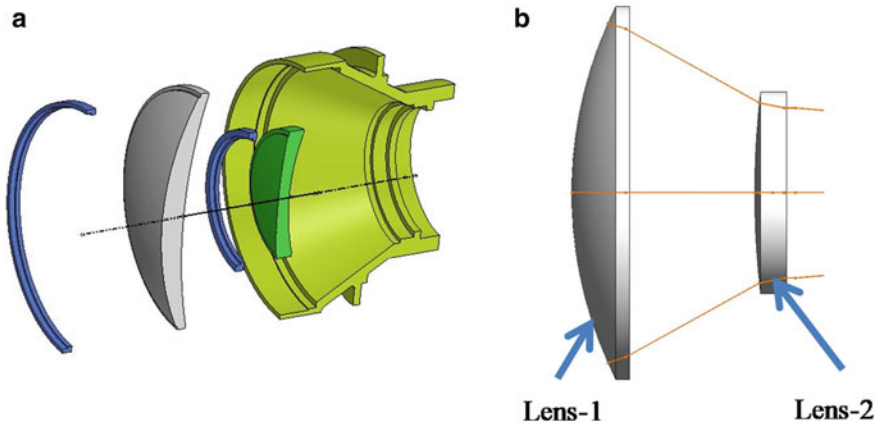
a Extender assembly exploded view. b Optical ray diagram
